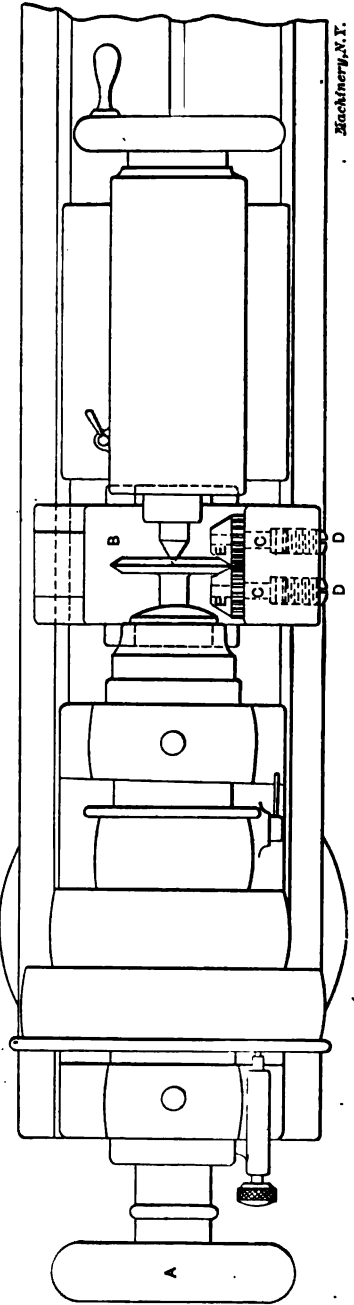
Bench Lathe with Fixture for Charging Diamond Lap.
